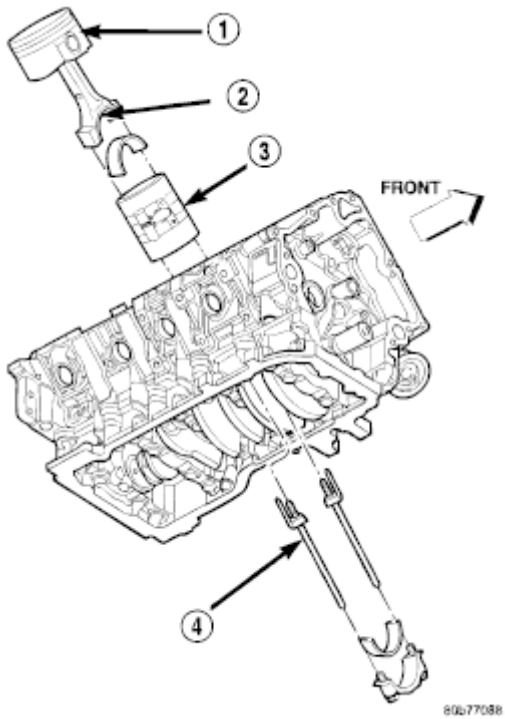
Identifying Piston Ring Compressor And Guide Pins Special Tool 8507
